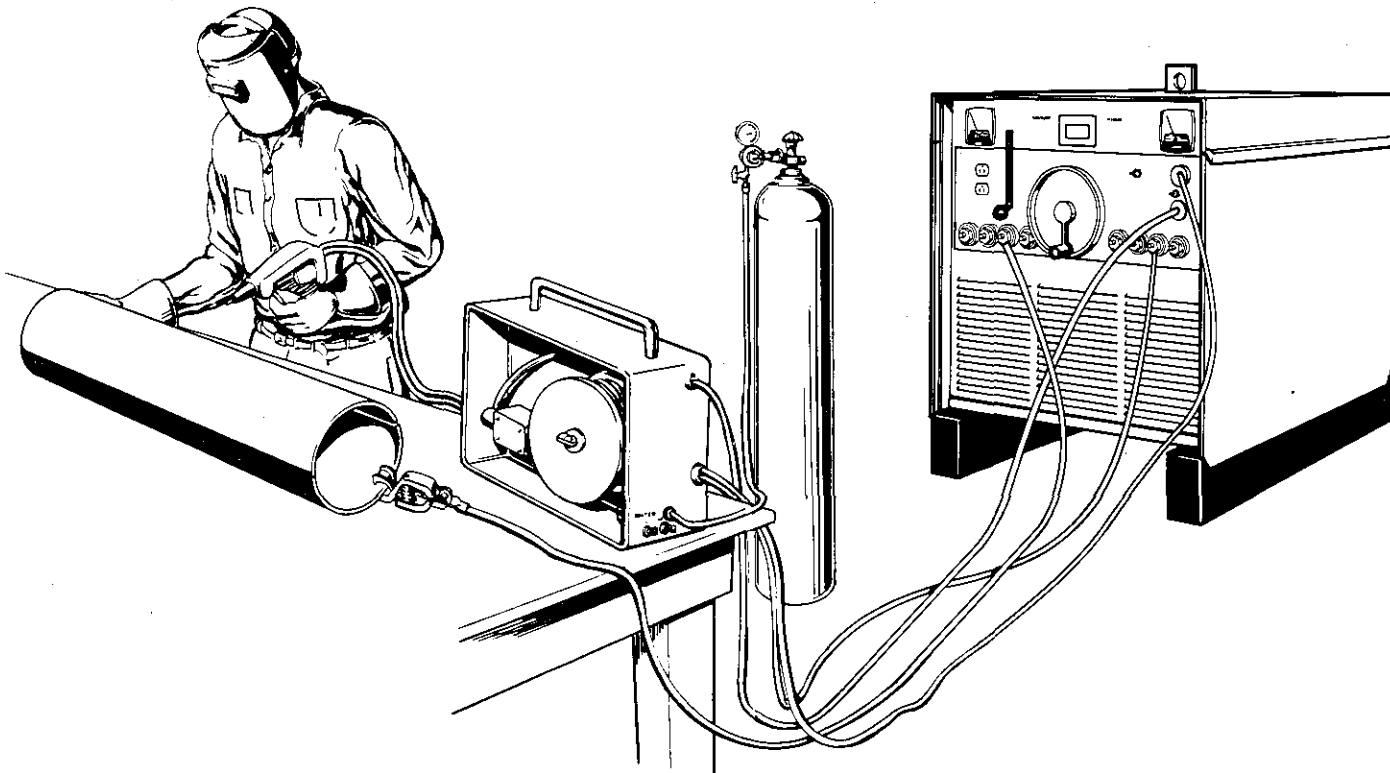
Connections for Gas Metal-Arc Welding (GMAW)
